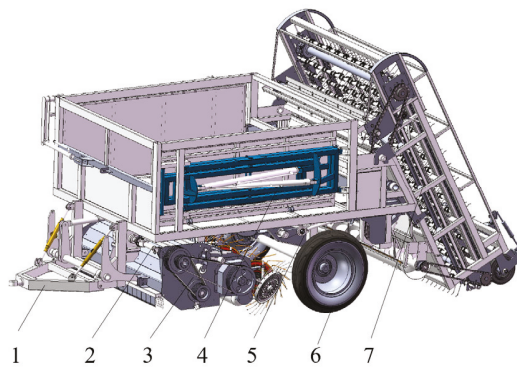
The residual film recycling machine: 1. Traction frame; 2. Power transmission system; 3. Straw crushing device; 4. Mulch storage and pushing out device; 5. Machine frame; 6. Wheels; 7. Hook-and-chain rail type residual film picking device.
